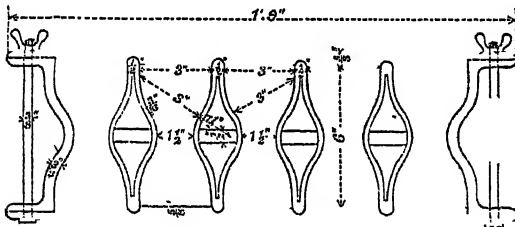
Frame for Moulding Five 1-inch Briquettes.
